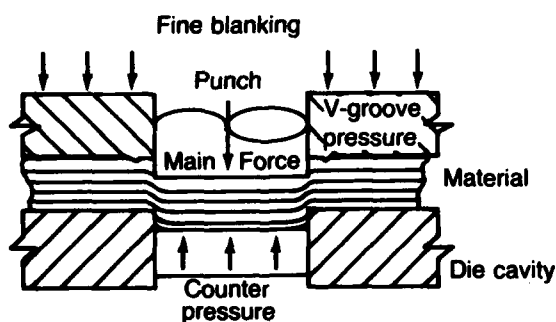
Cross-sectional view of a fine-blanking die fabricating a part.
